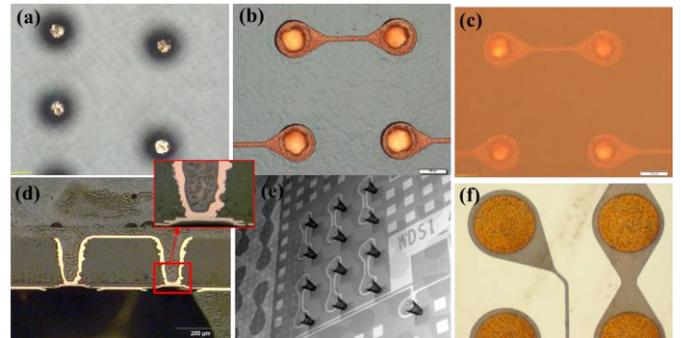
Backside RDL fabrication processes results (a) Laser drilled TMVs stopped on front side RDL pads (b) backside RDL and partially plated TMVs (c)-(e) polymer plugged TMVs (f) Backside RDL patterning for PoP assembly.
